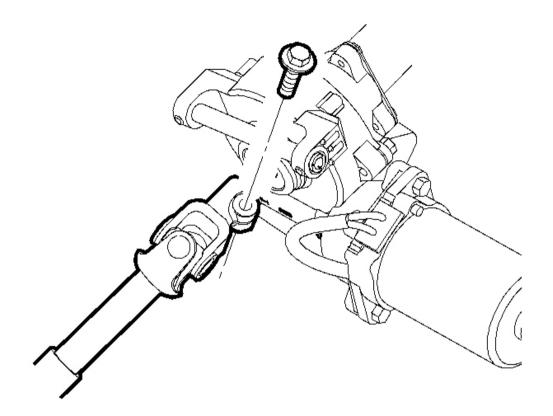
Steering Wheel Column & I-Shaft Bolt Courtesy of GENERAL MOTORS CORP.
